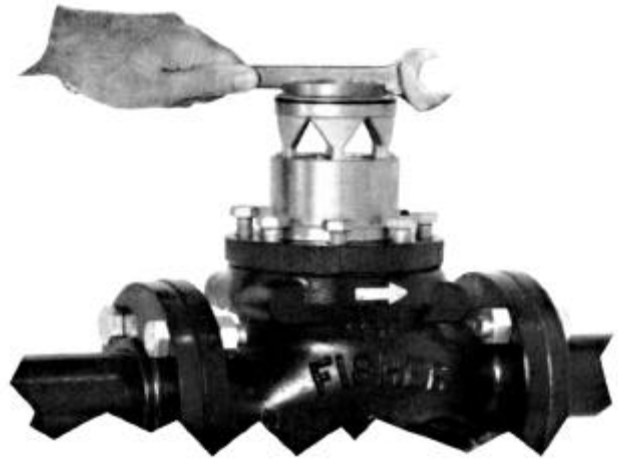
Seat Ring/Cage Removal or Installation Using Body as Holding Fixture
